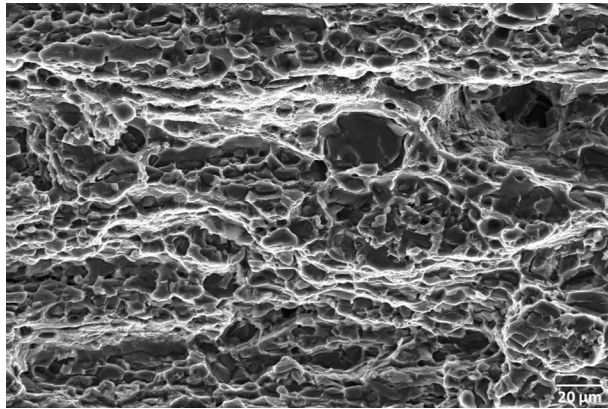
Higher magnified image of the fracture surface shown in Fig. 32
